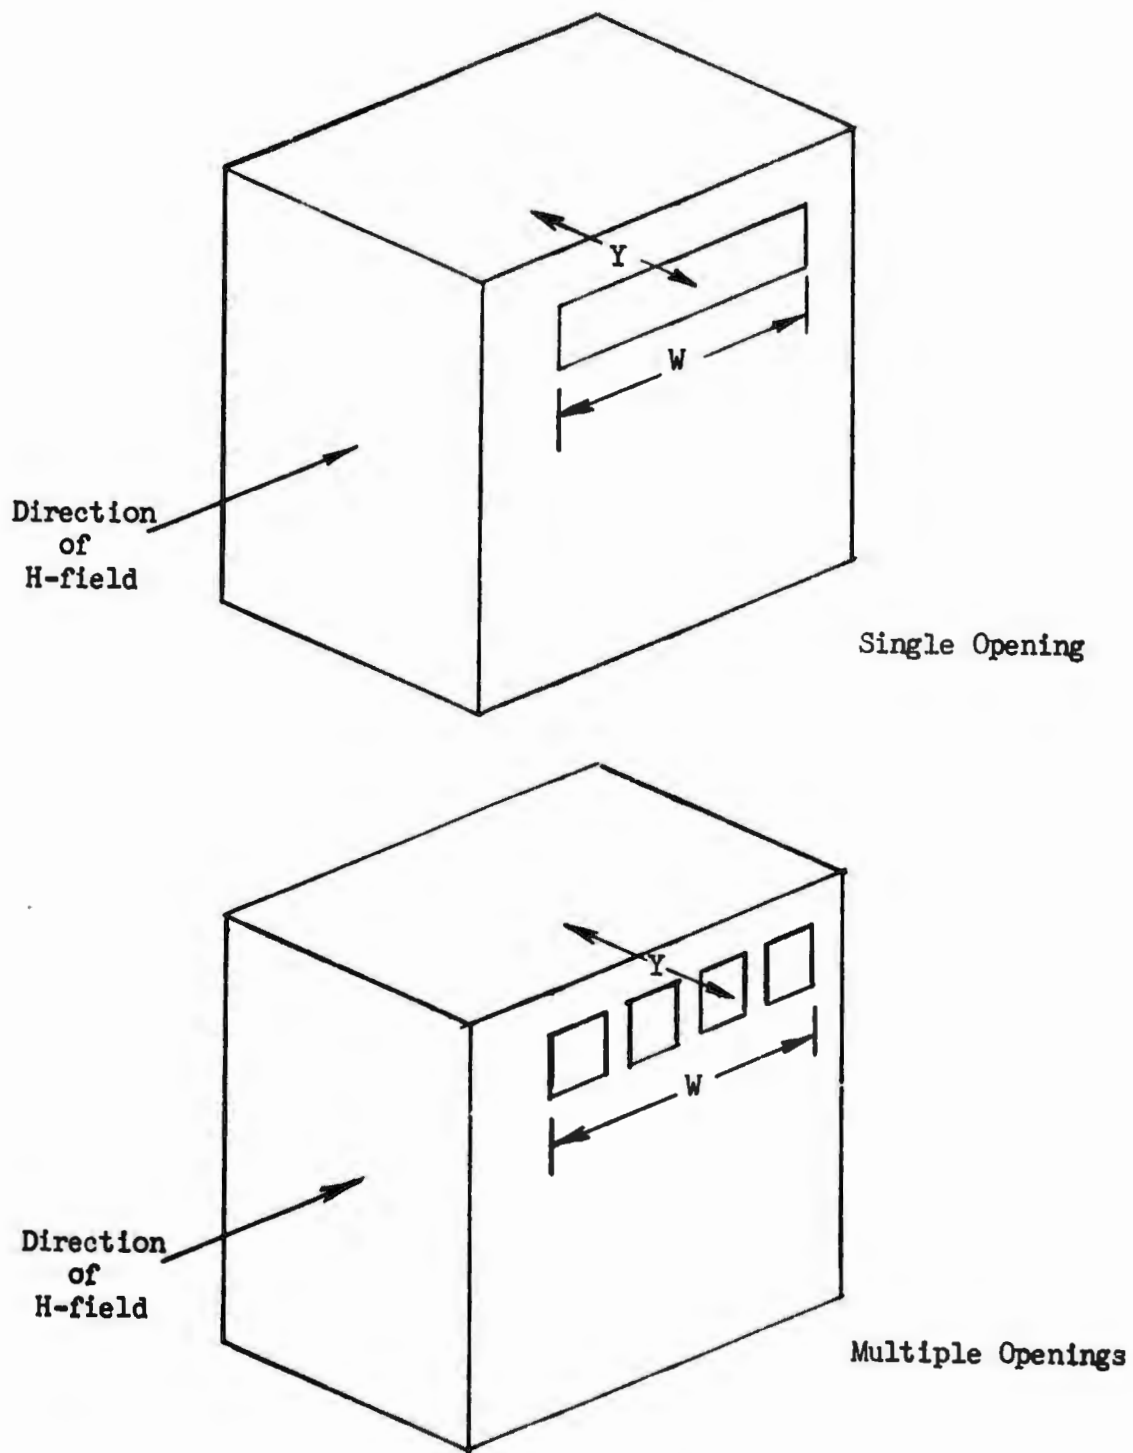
Dimensions for Openings in Equipment Cabinets
